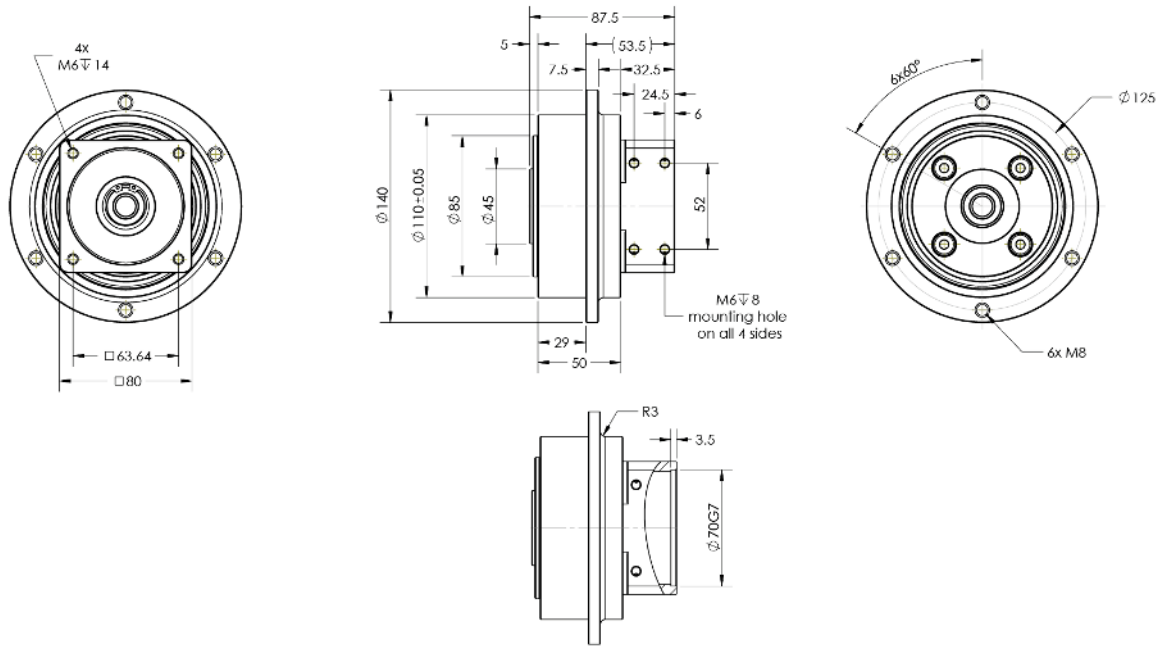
Dimensions – gearbox GB01-PL02H22505000 radial mounting
